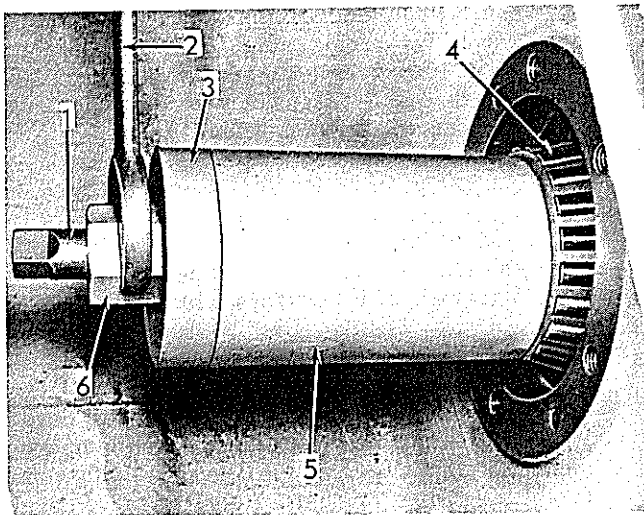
Installing Bevel Gear Shaft Bearing Cone
